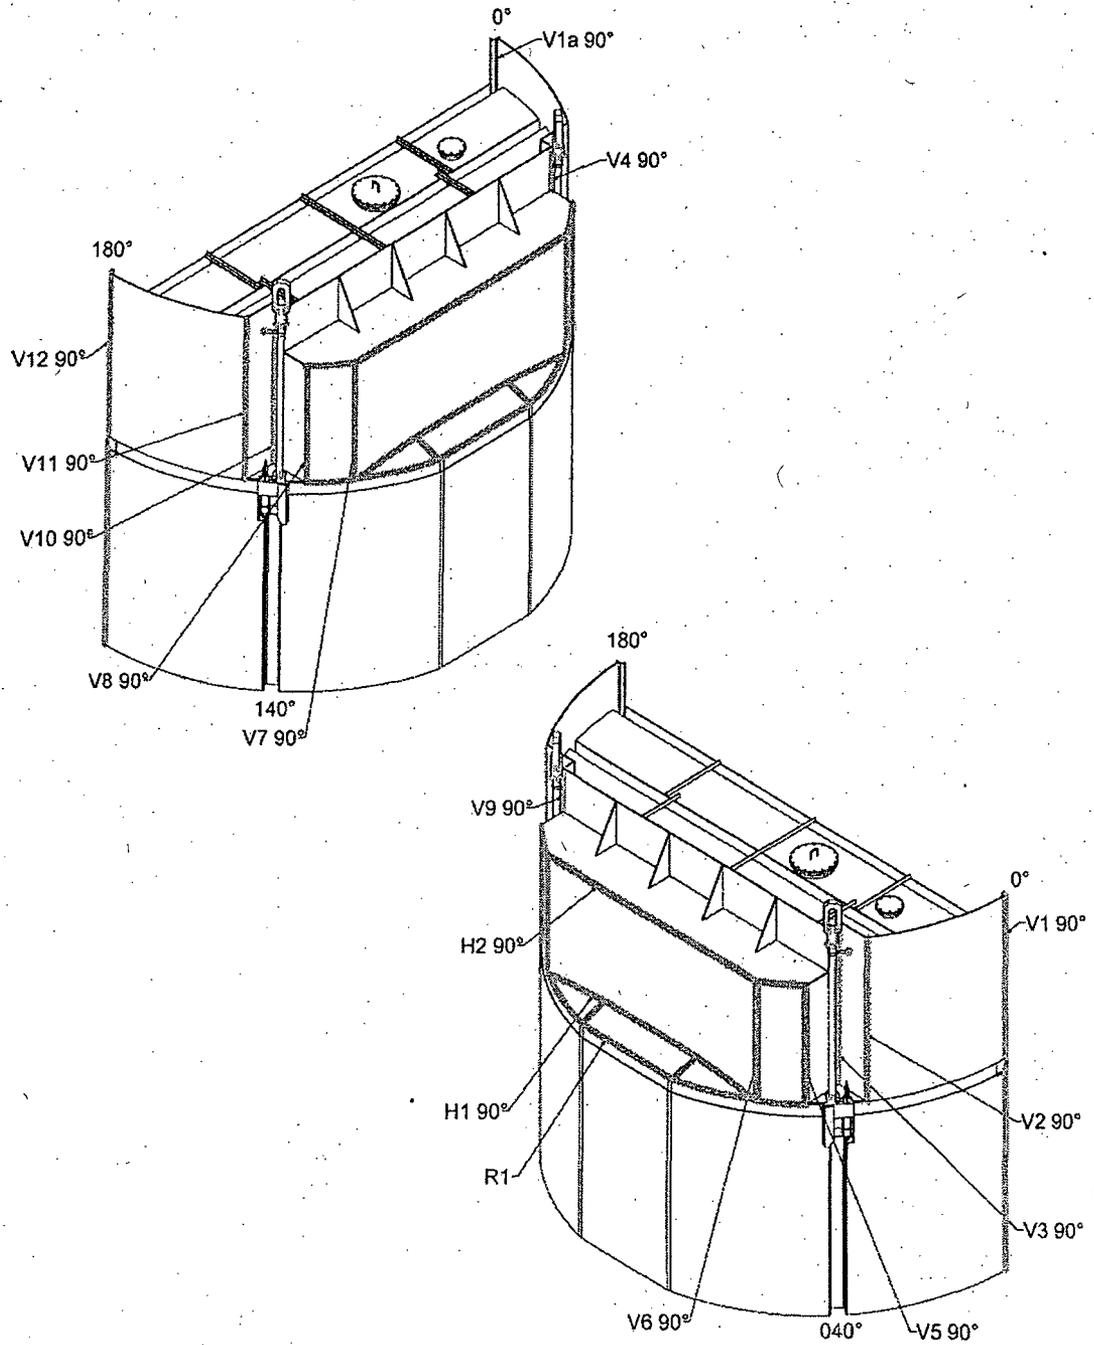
Inspections: Outer Dryer Hood and Cover Plate (Square Hood Dryer)
